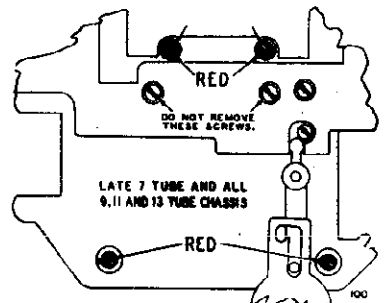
Location of 4 Red Mounting Screws in Late Models
